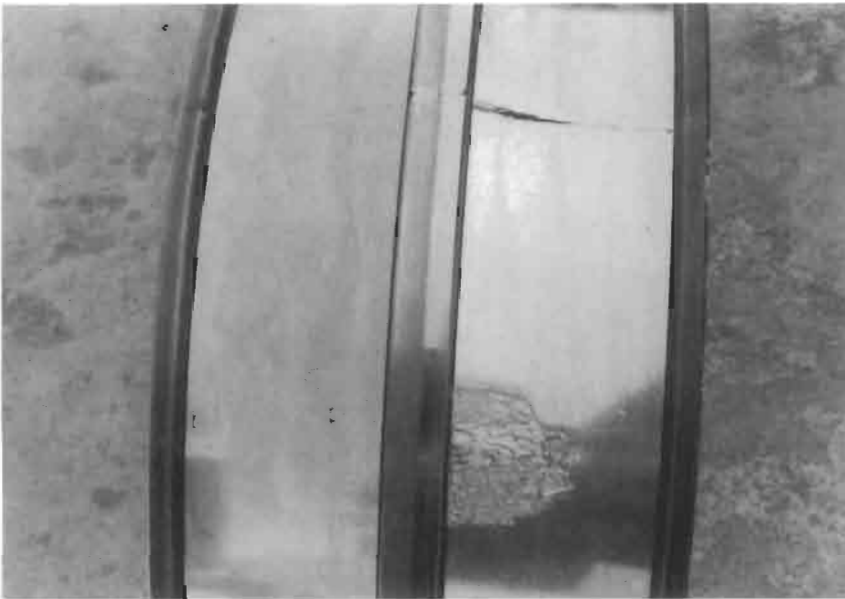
Localized flaking damage on the inner ring of a thrust bearing.
